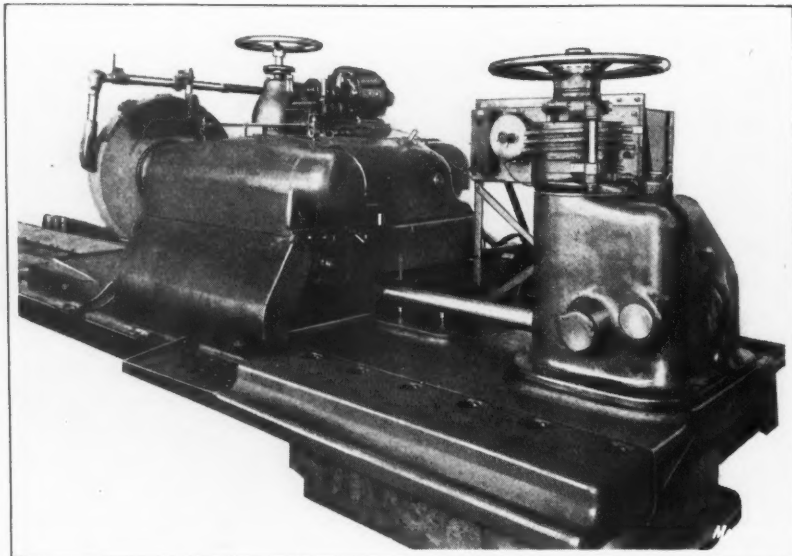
Grinding-wheel and Carriage of the Roll Grinding Machine
